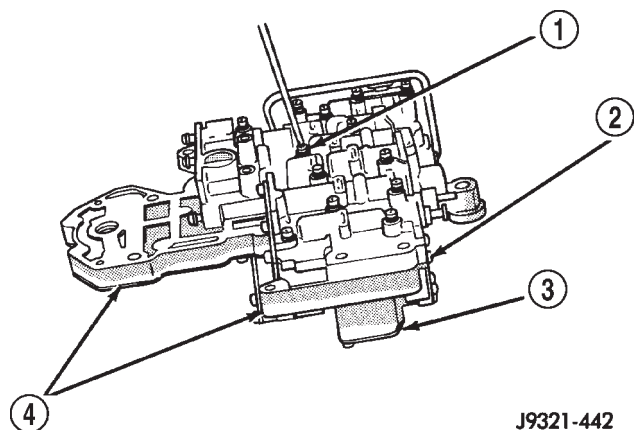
Installing Lower Housing On Transfer Plate And Upper Housing
